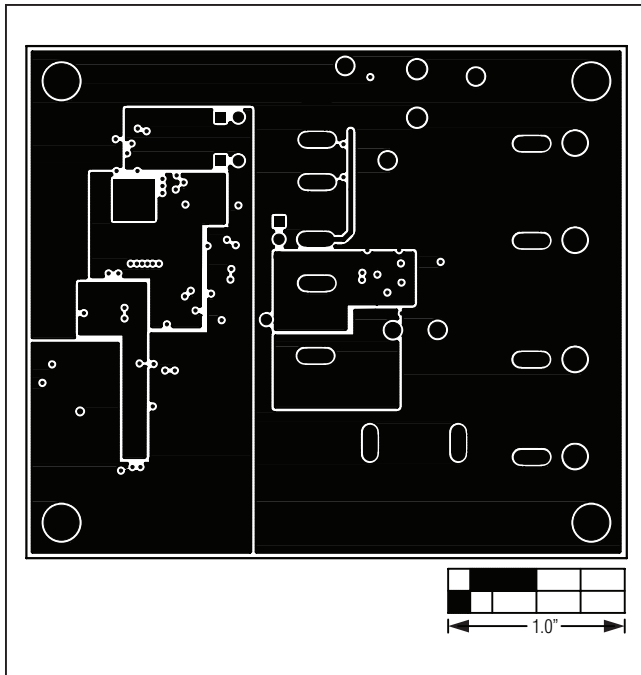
MAX97003 EV Kit PCB Layout—PWR Layer 4
